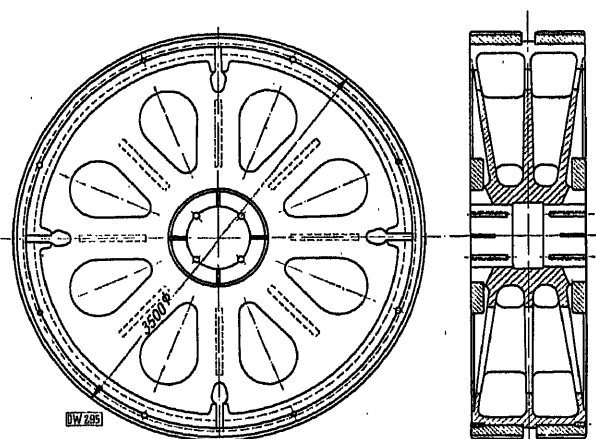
A.E.G., marine gear wheel (diameter 3500 mm.)
